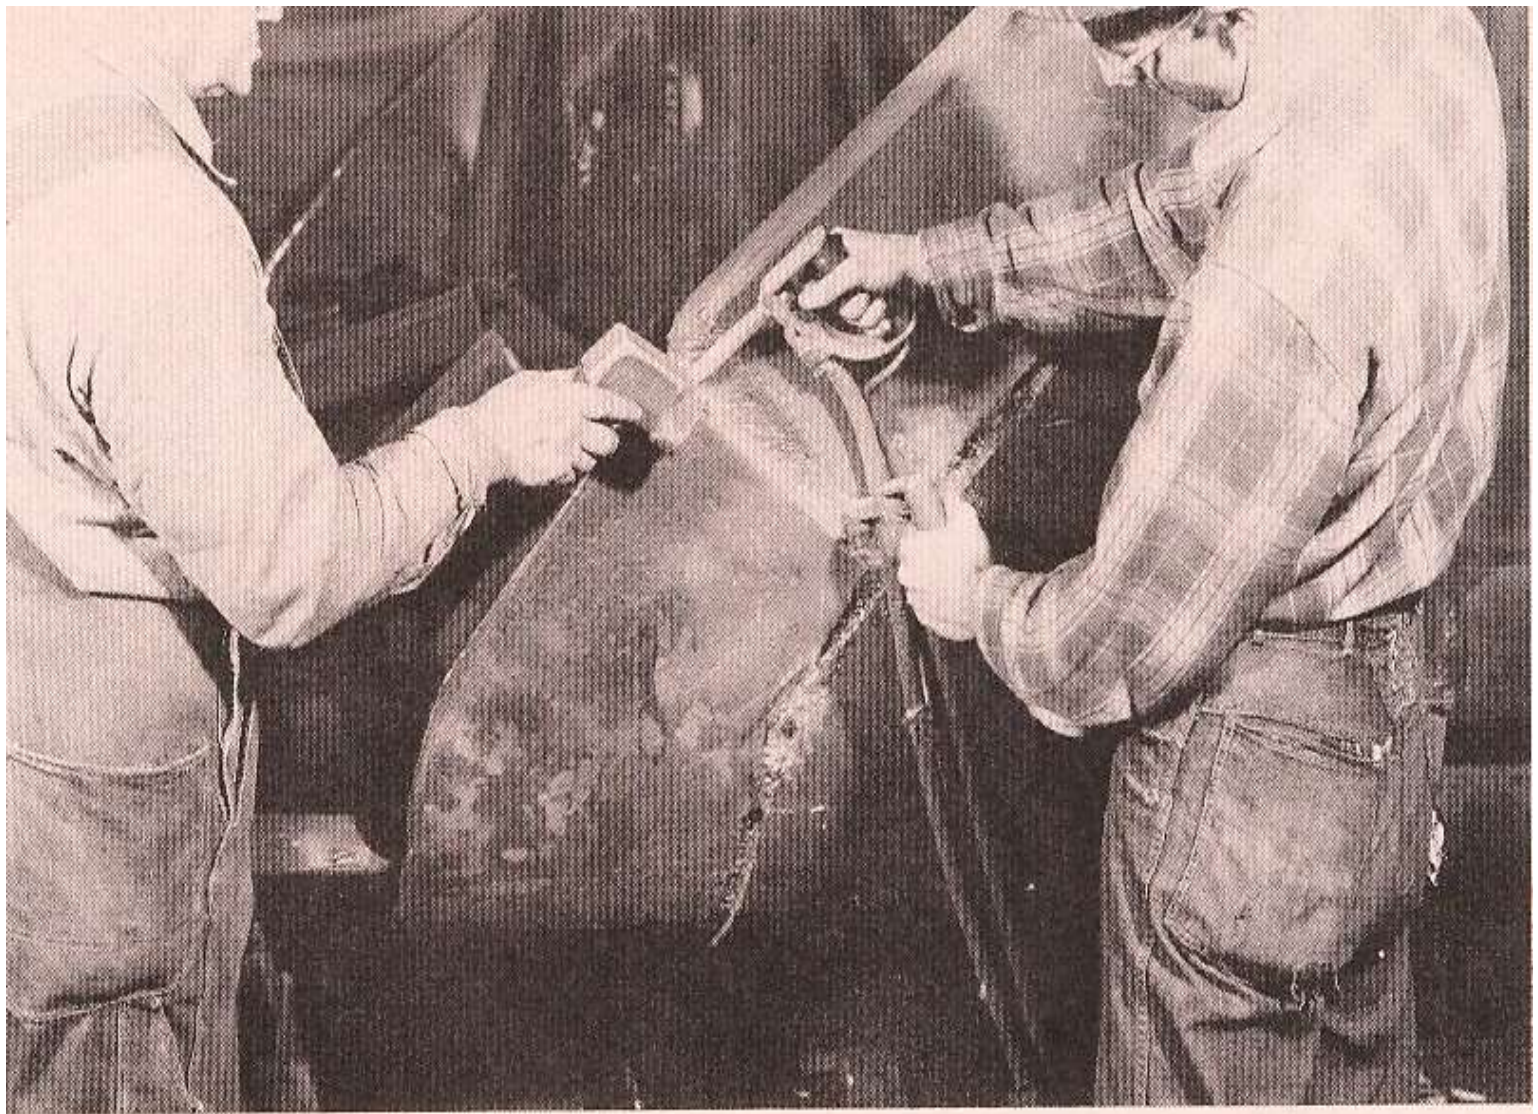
Using magnetic particle inspection.
